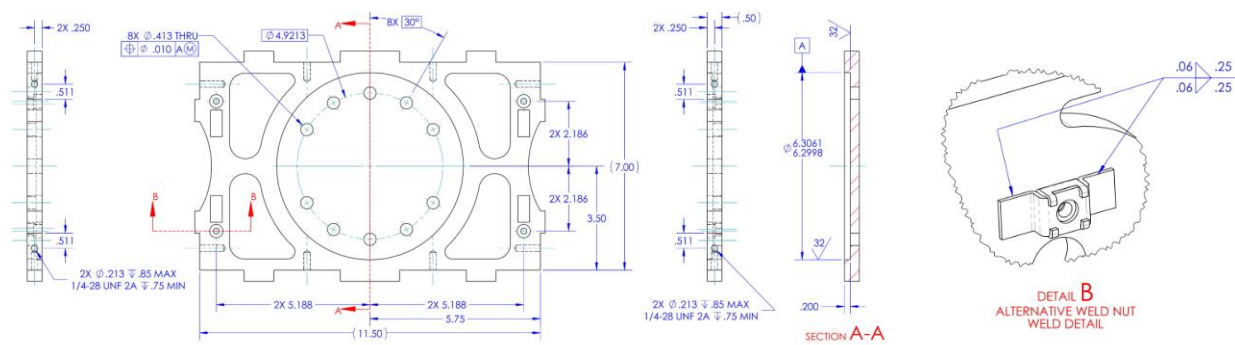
Snips from the drawings submitted to UAC. The snips show (a) an example of GD&T from #03-0411-C-A and (b) one of the weld symbols on #03-0300-C-A.
